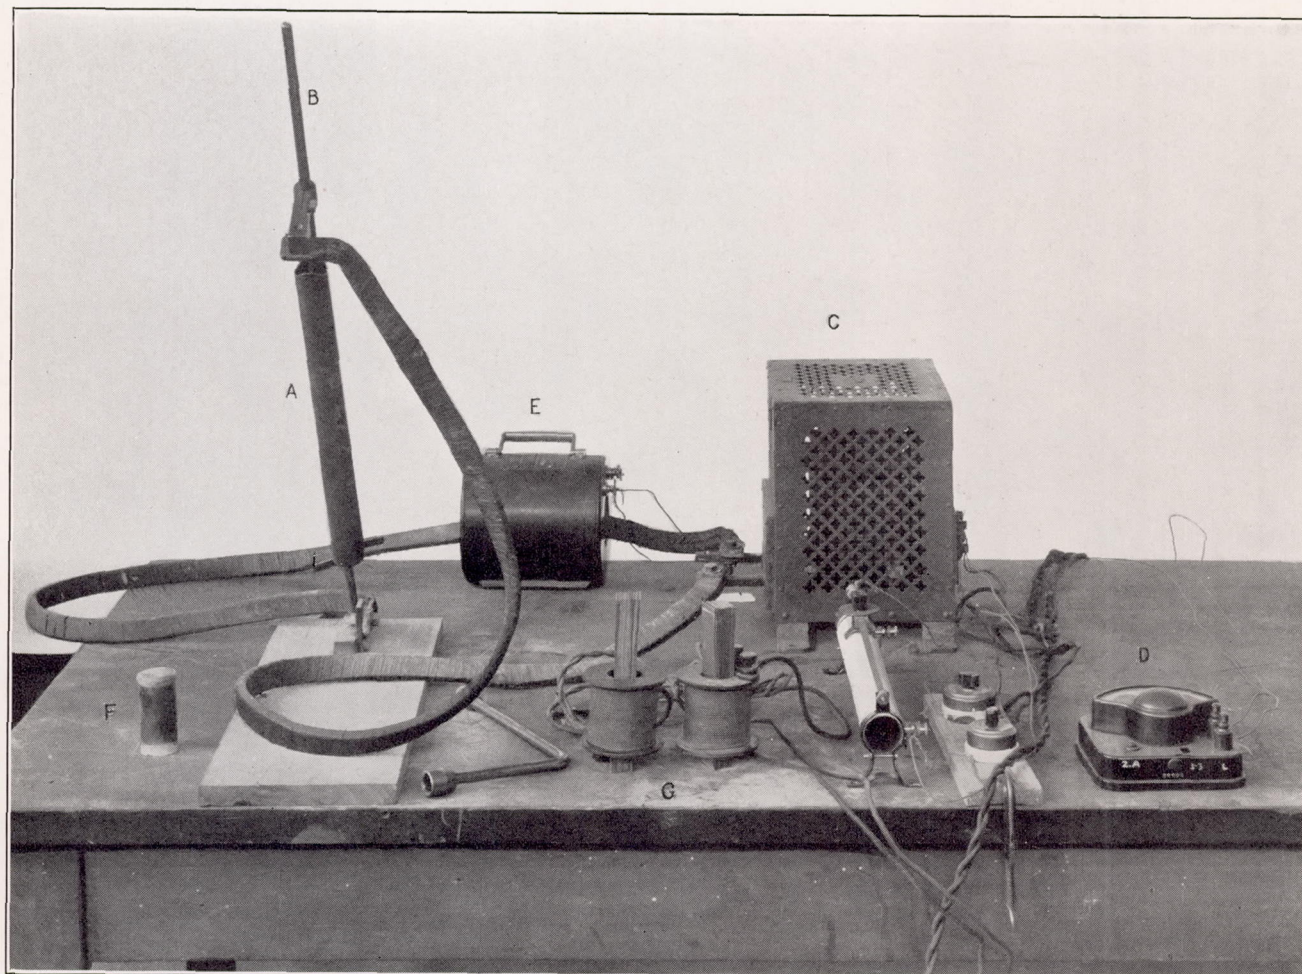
Apparatus for detecting seams in tubing by the magnetic powder method of inspection. The tube A was magnetized by a heavy alternating current produced in the copper rod B by the transformer C. The ammeter D was used with the current transformer E to measure the current. The magnetic powder was applied to the surface of the tube by means of the shaker F. The iron-cored coils G were used when a portable magnetizing apparatus was desired.
